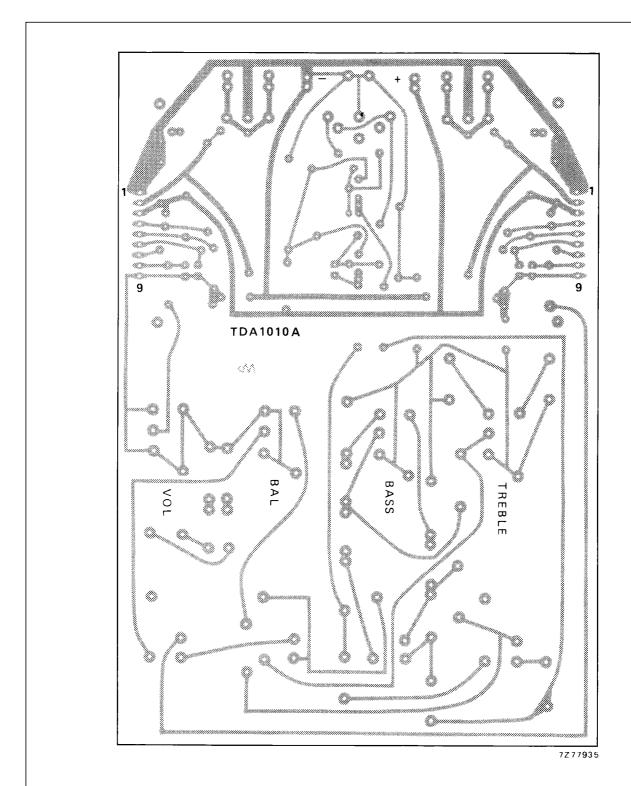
Track side of printed-circuit board used for the circuit of Fig.17 (Fig.16 partly); p.c. board dimensions $169 \text{ mm} \times 118 \text{ mm}$.
